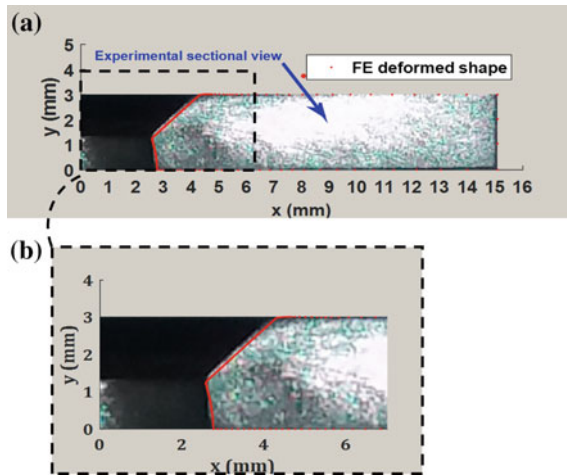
Superposition of the section view of the workpiece ($e = 3$ mm, $r_i = 2.8$ mm, $r_t = 0.2$ mm) with the numerical shape
